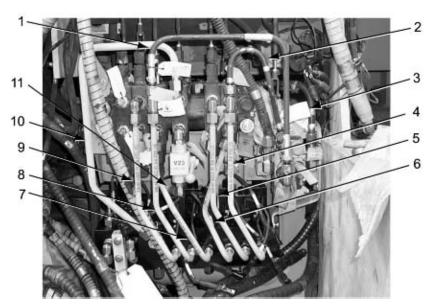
Installation of HDC Primary Manifold Assembly Hydraulic Tubes and Hoses
